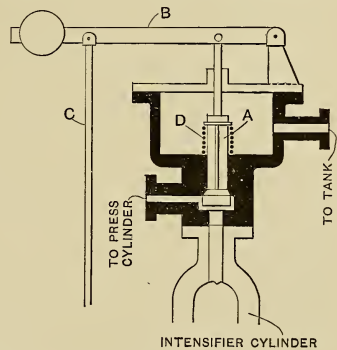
SECTION OF VALVE BETWEEN SUPPLY-TANK AND INTENSIFIER-PUMP OF PRESS SHOWN IN FIG. 4
